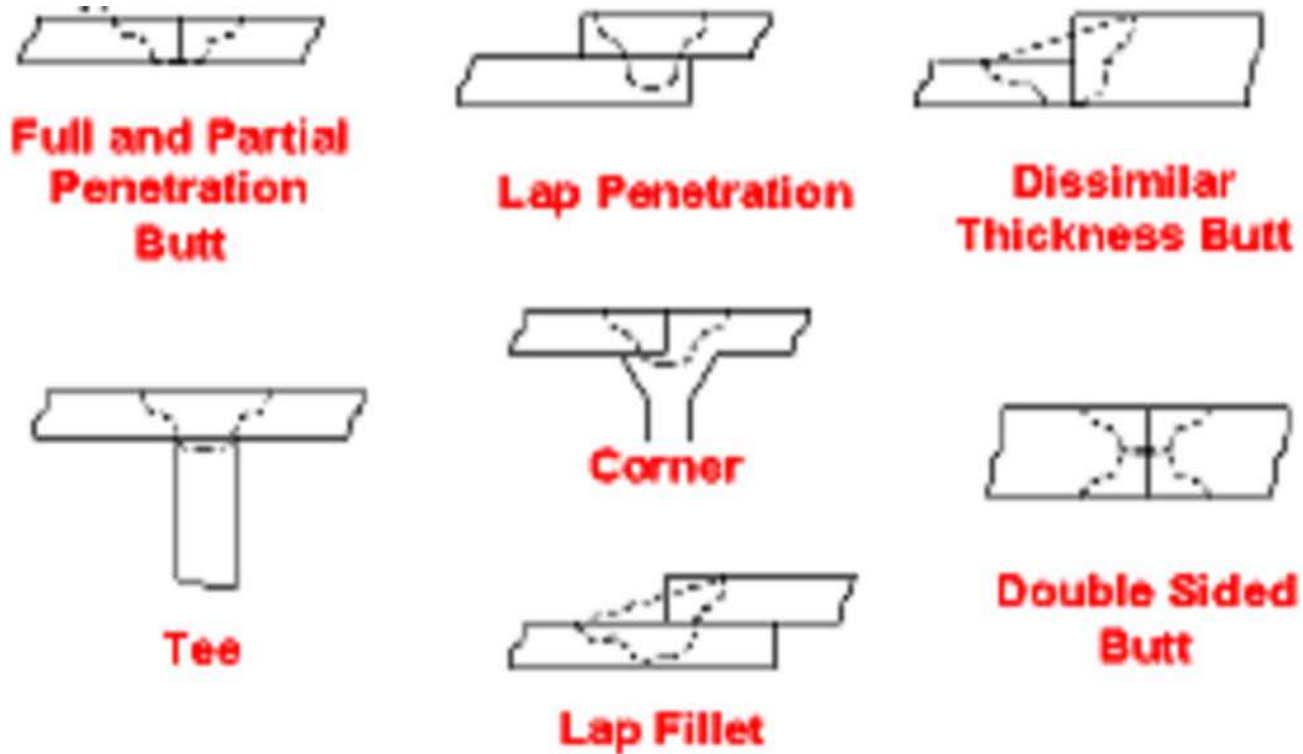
Friction stir weld joint geometries (Halverson and Hinrichs, 2006).
